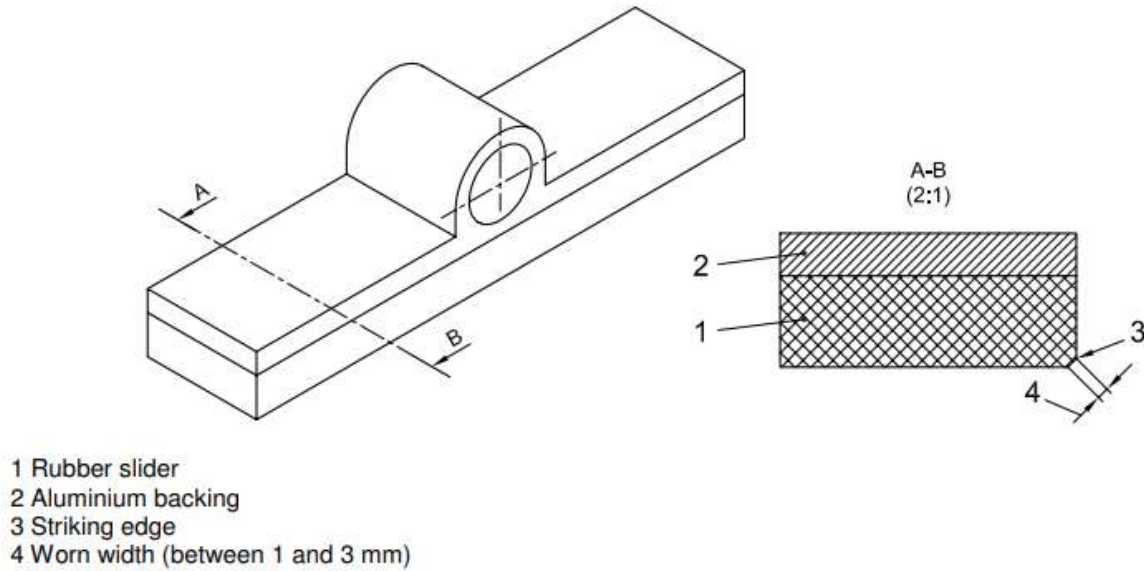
Slider assembly illustrating the worn width of the striking edge
